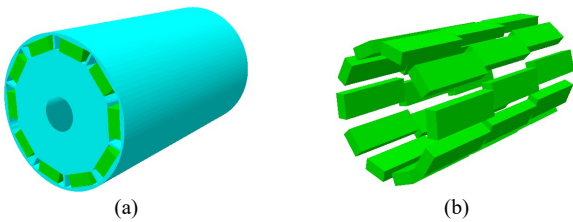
3D view of three-step skewed IPM rotor. (a) Rotor and (b) Three-step skewed PM segments.
